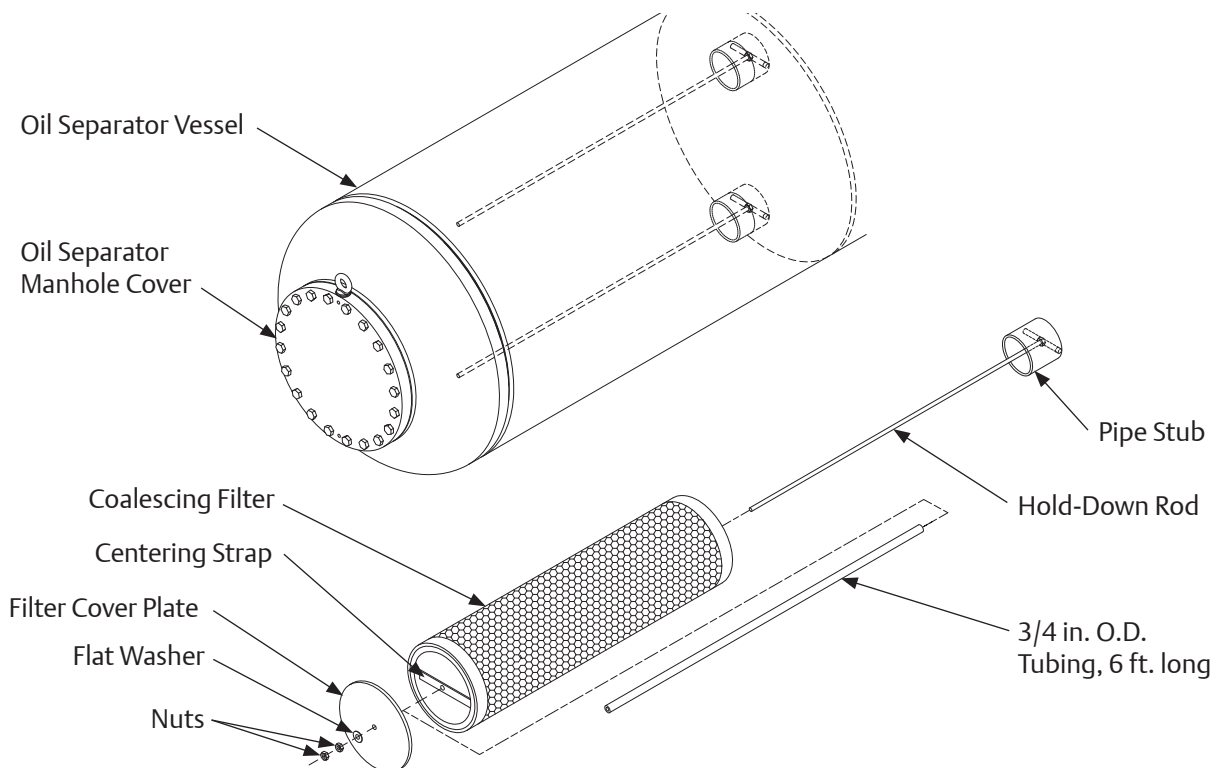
Oil Separator Manhole Cover and Coalescing Filter Assembly
